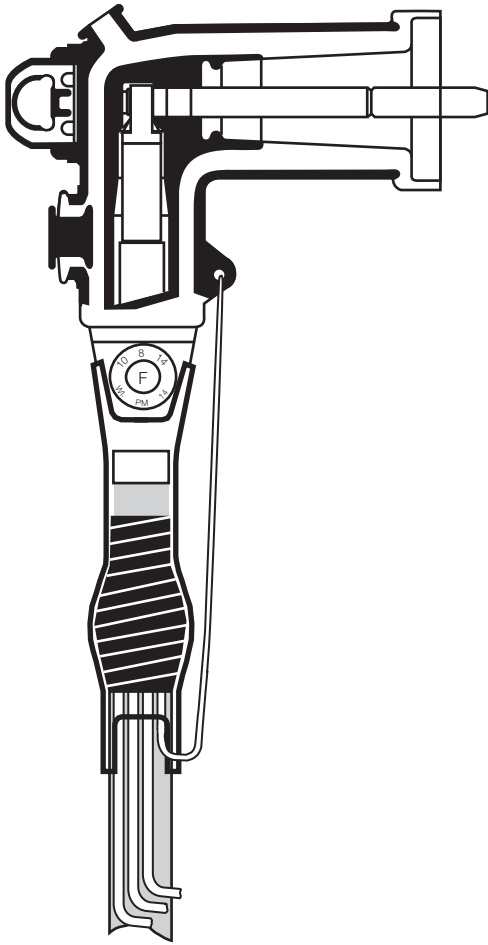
Illustration of completed jacket seal and 200 A elbow installed on cable
